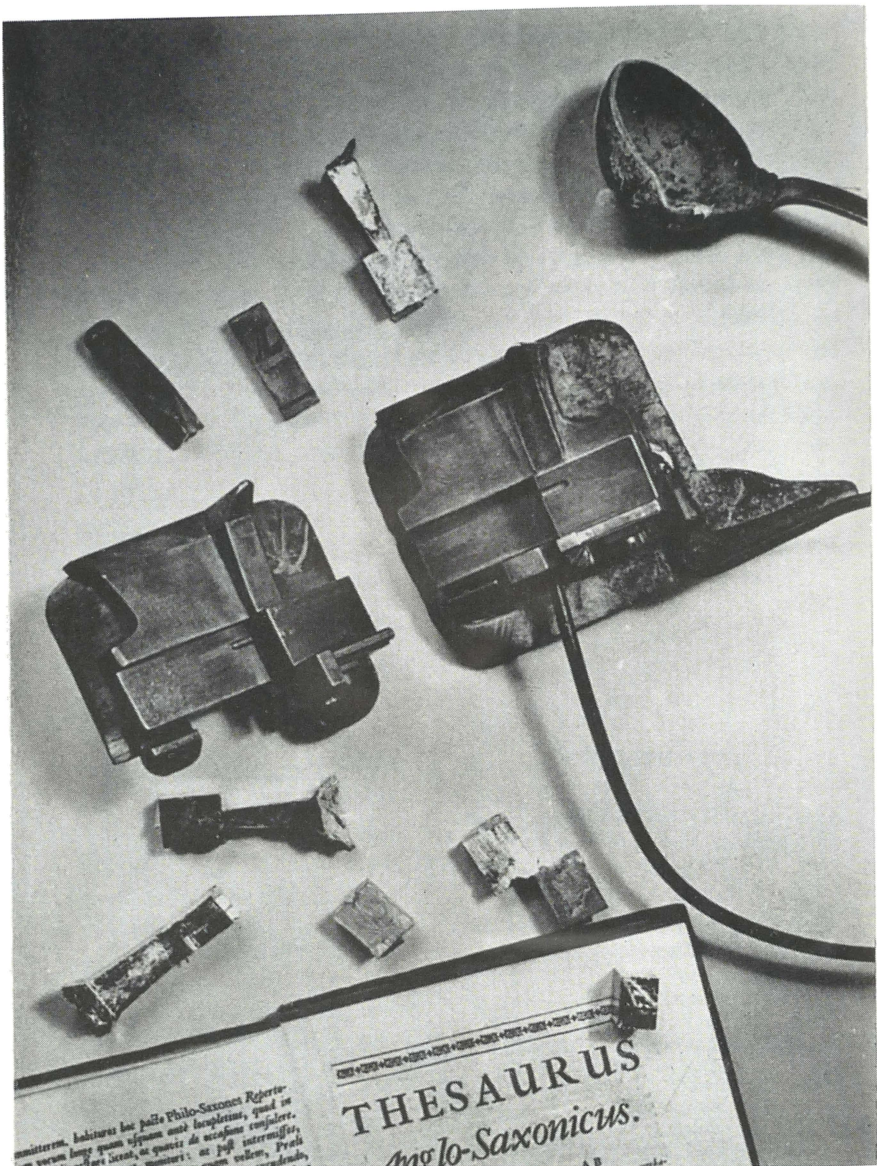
An English typesetter's mould of about 1850 and pieces of type cast in it. University Press, Oxford. Photograph by J. W. Thomas. The mould measures about  $2\frac{1}{2}$  in. square
